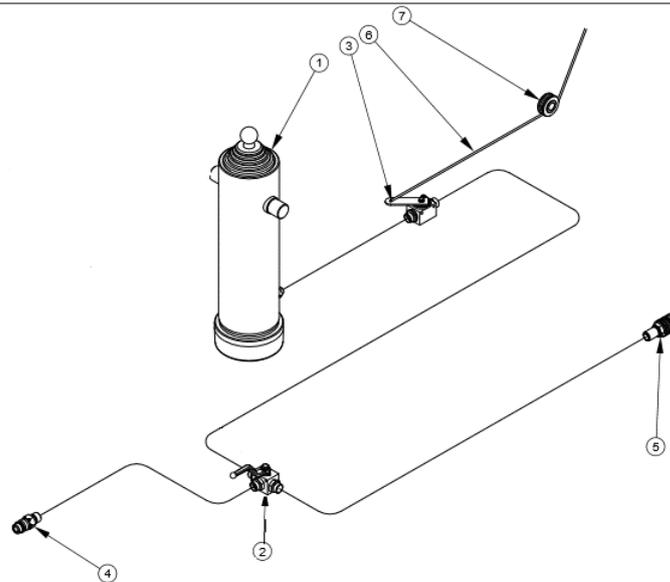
The diagram of the hydraulic system in the tilting mechanism of the trailer's body: 1 – telescopic cylinder, 2 – switching valve, 3 – cut-off valve, 4 – a plug quick coupling, 5 – quick coupling, 6 – control cable for the cut-off valve, 7 – cable roller
